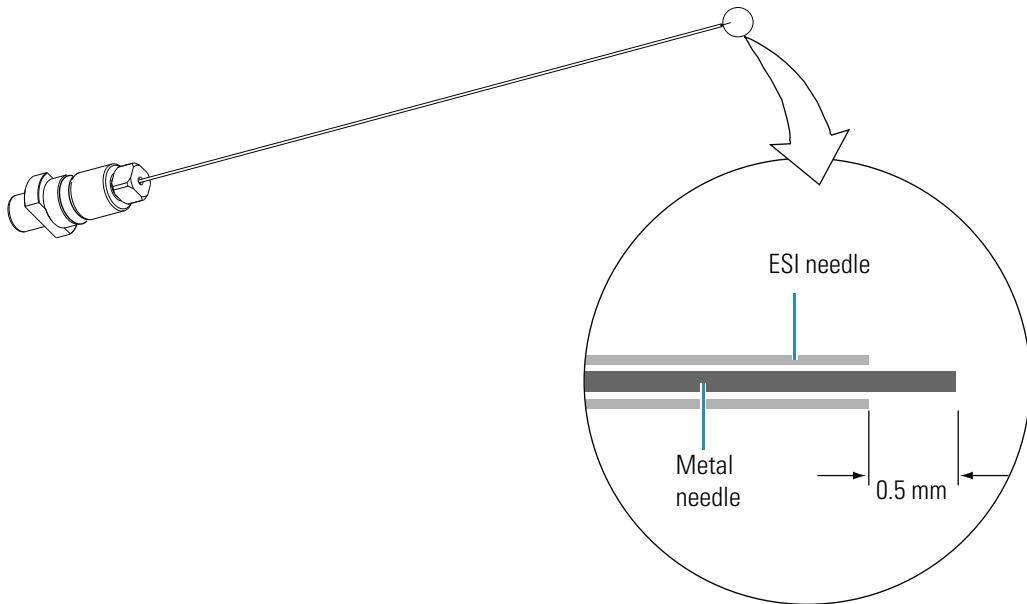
Metal needle insert assembly with an enlarged view of the stainless steel needle tip
